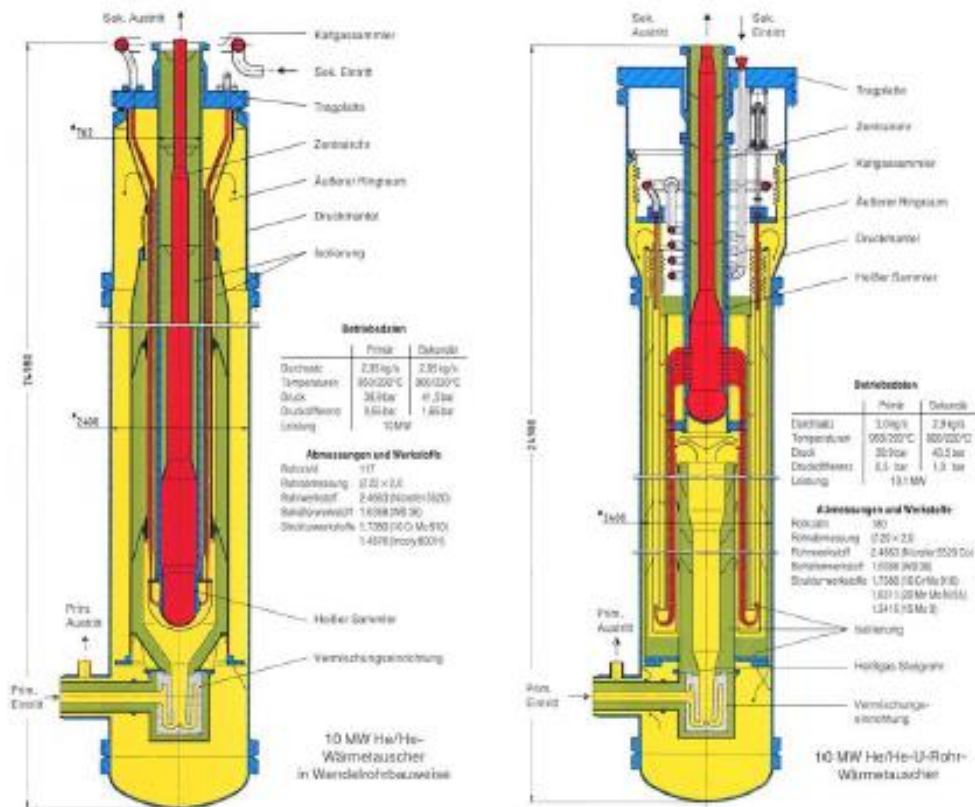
Two IHX components tested in KVK (left: Helical tube bundle by SteinmÖller; right: U tube bundle by Balcke-Durr)
